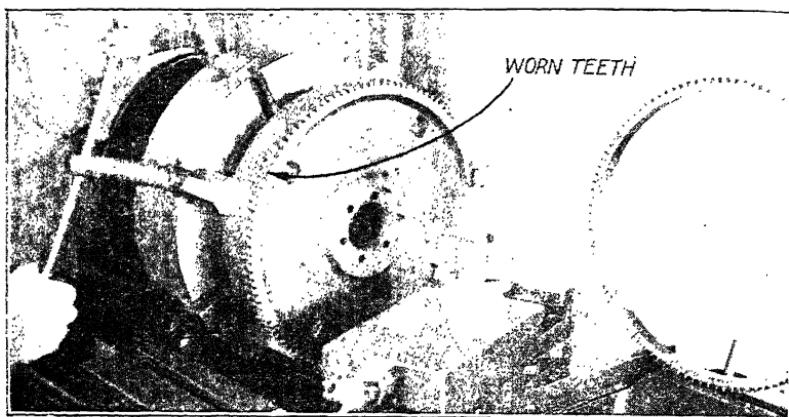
Chucking a Damaged Flywheel for Machining Off the Teeth
